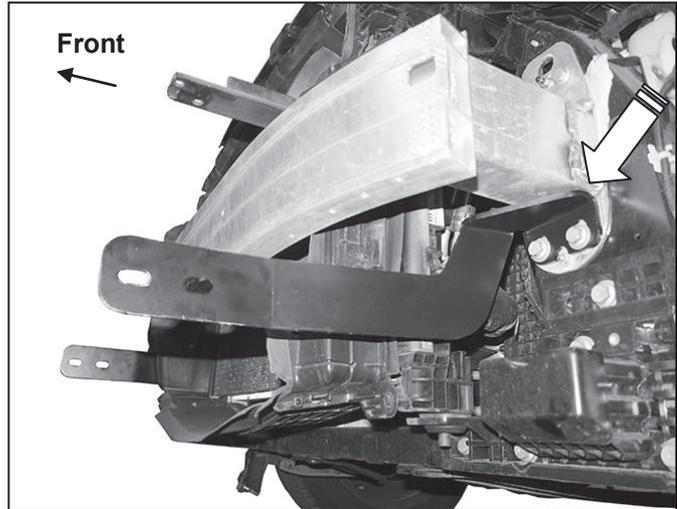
Reuse factory hex bolt (arrow) to attach driver/left Top Bracket to bumper bracket
